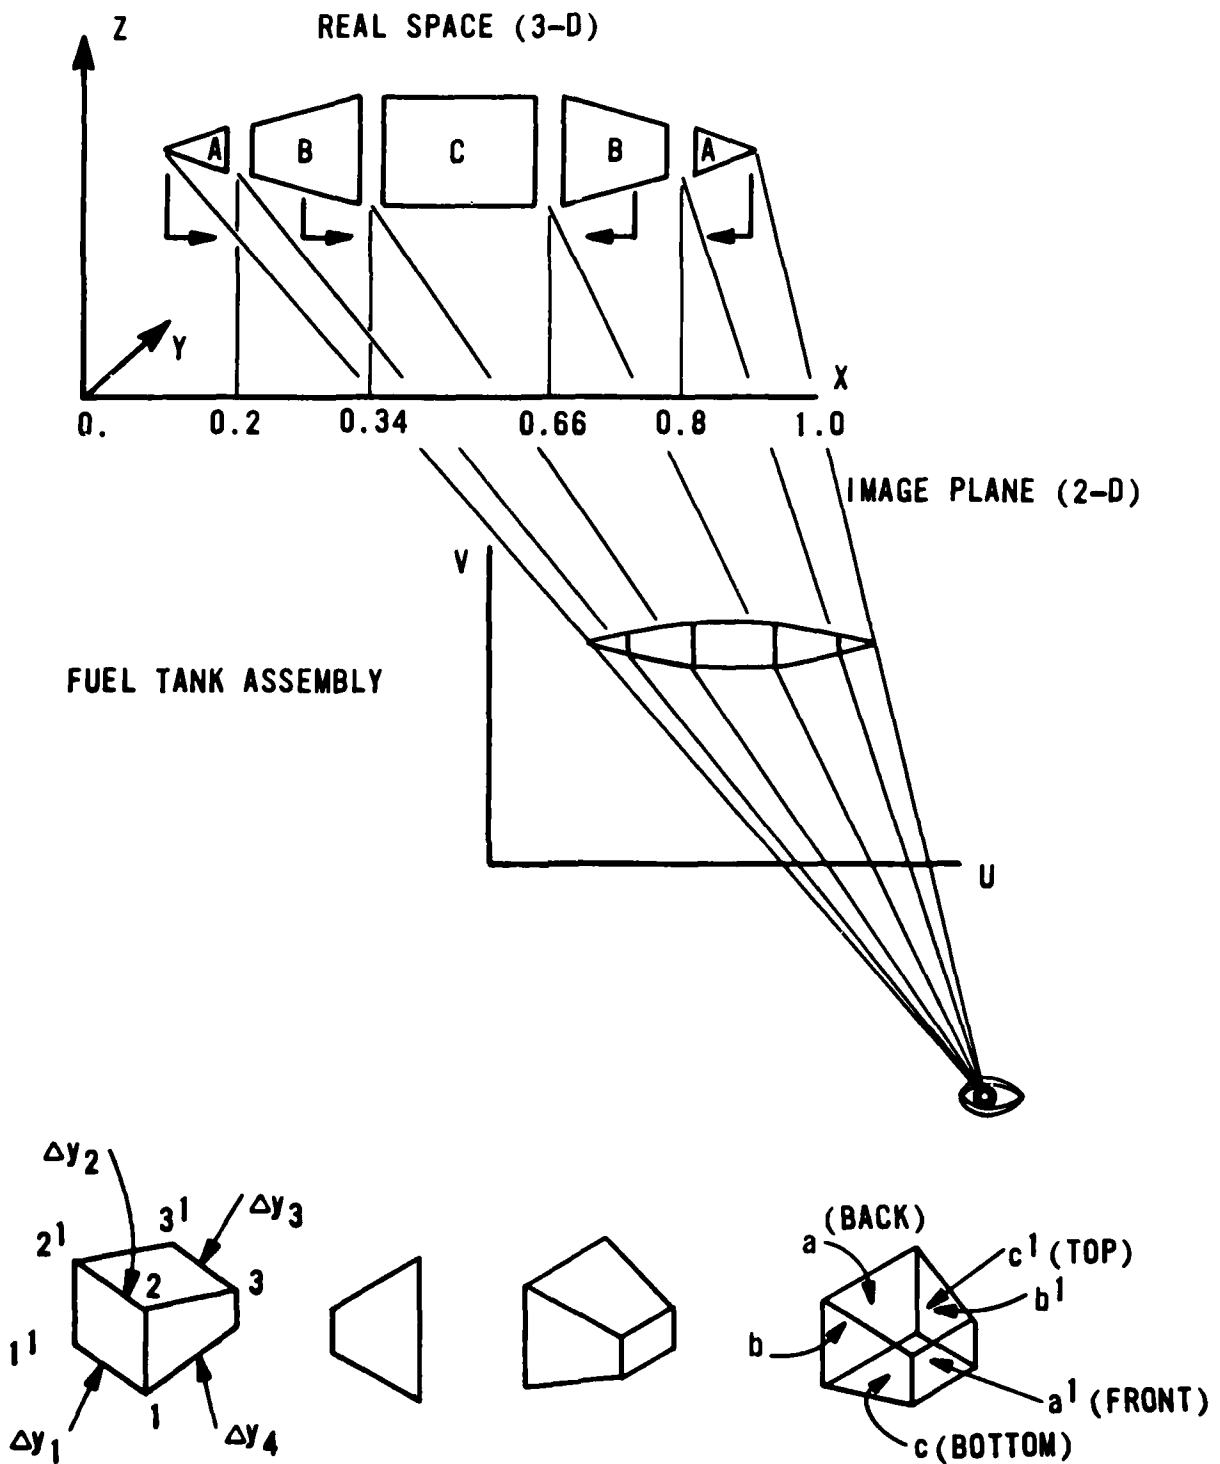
Fuel tank assembly. Generating a fuel tank for an F-16 by employing parallelepipeds.
